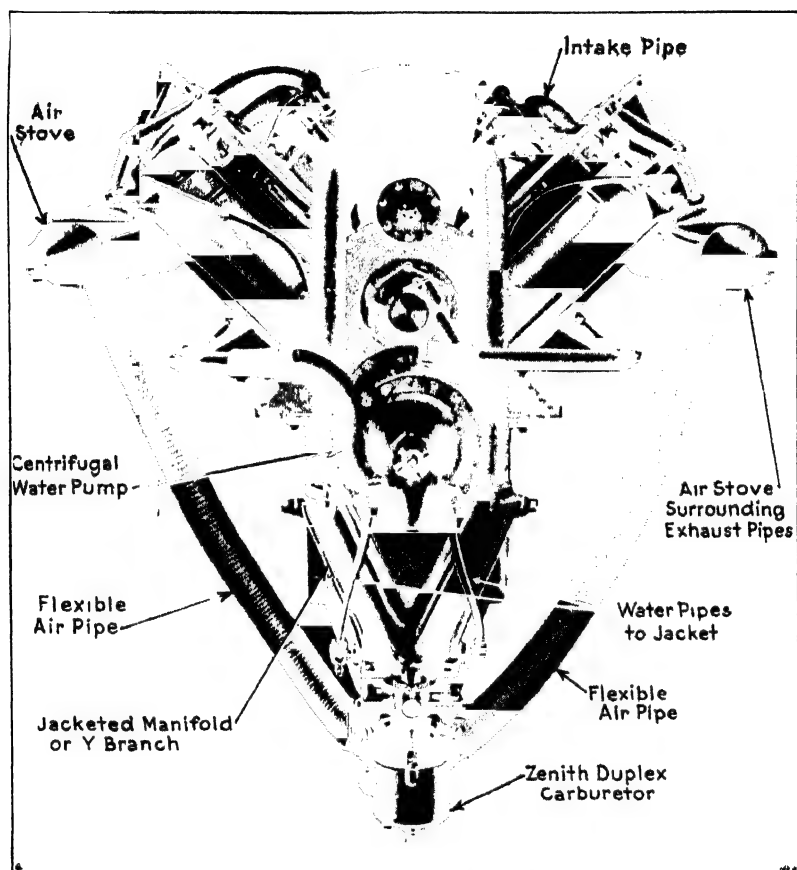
Rear View of Curtiss OX2, 90 Horsepower Airplane Motor Showing Zenith Carburetor Location, Design of Intake Manifold, which was Water Jacketed and Hot Air Leads from Air Stoves Surrounding Exhaust Pipes.
